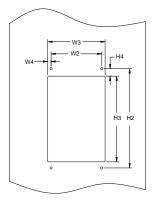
Flange installation diagram of inverters of 220V 0.75–15 kW and 460V 1.5–30 kW
